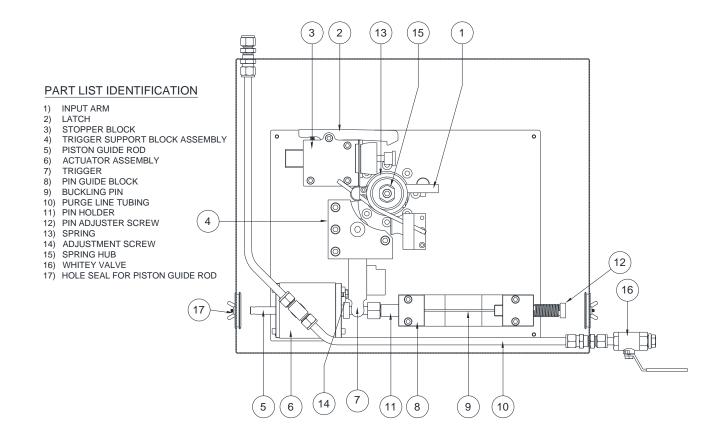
(Alternate). Mechanism Assembly (BPIV Closed) - torsion spring
